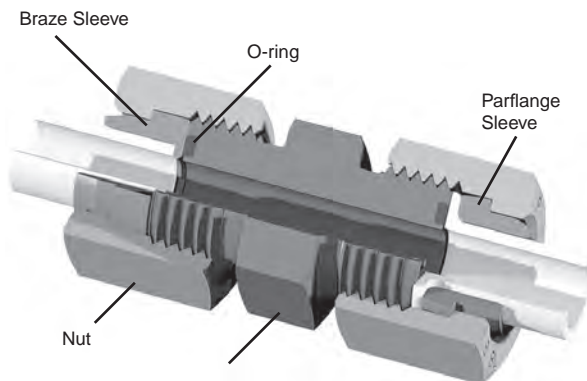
Seal-Lok Union cutaway with flanged and brazed assemblies
